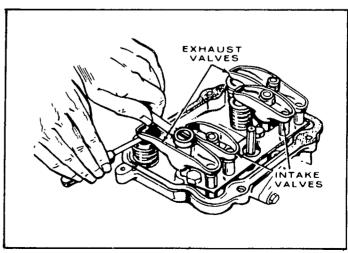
VALVE CLEARANCE ADJUSTMENT
